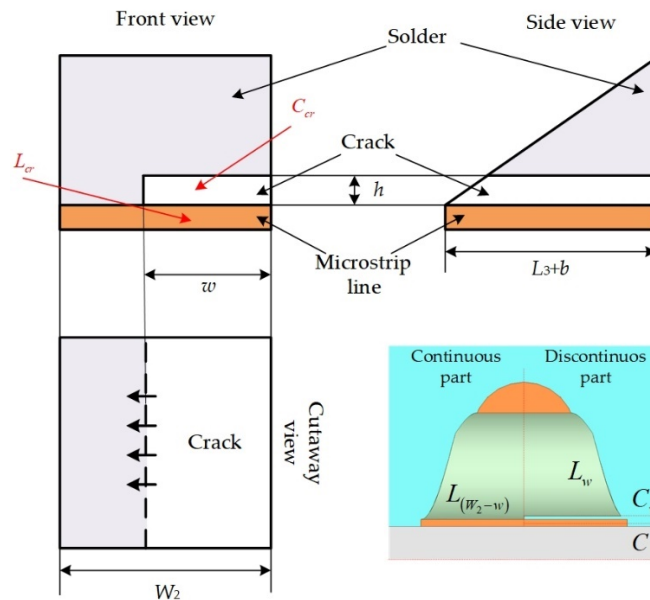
Simplified diagram of the cracked solder joint.
